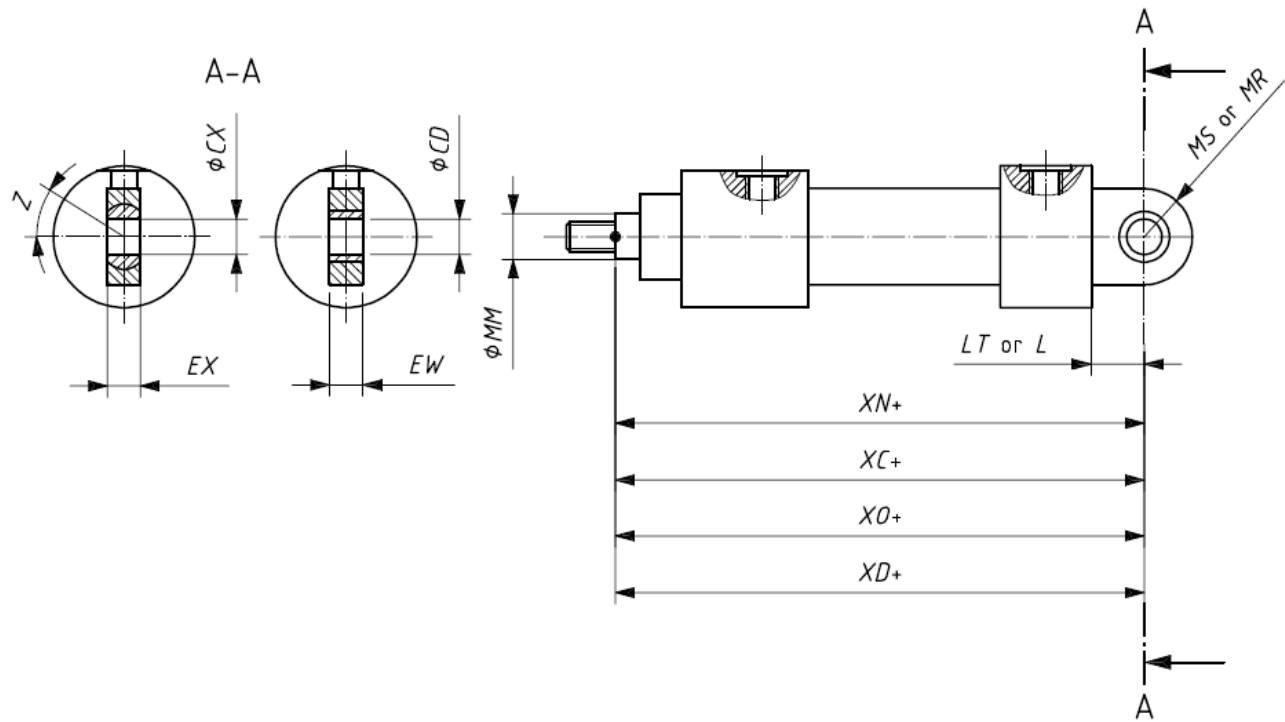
MP3 — Cap, fixed plain eye, MP4 — Cap, detachable plain eye, MP5 — Cap, fixed eye with spherical bearing and MP6 — Cap, detachable eye with spherical bearing
